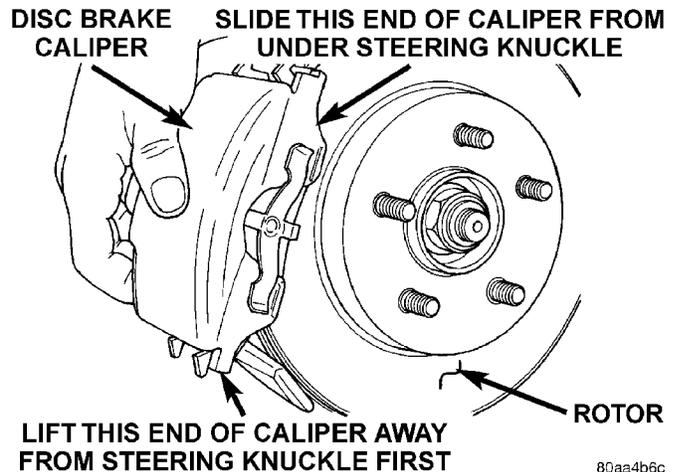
Removing Caliper Assembly From Steering Knuckle
